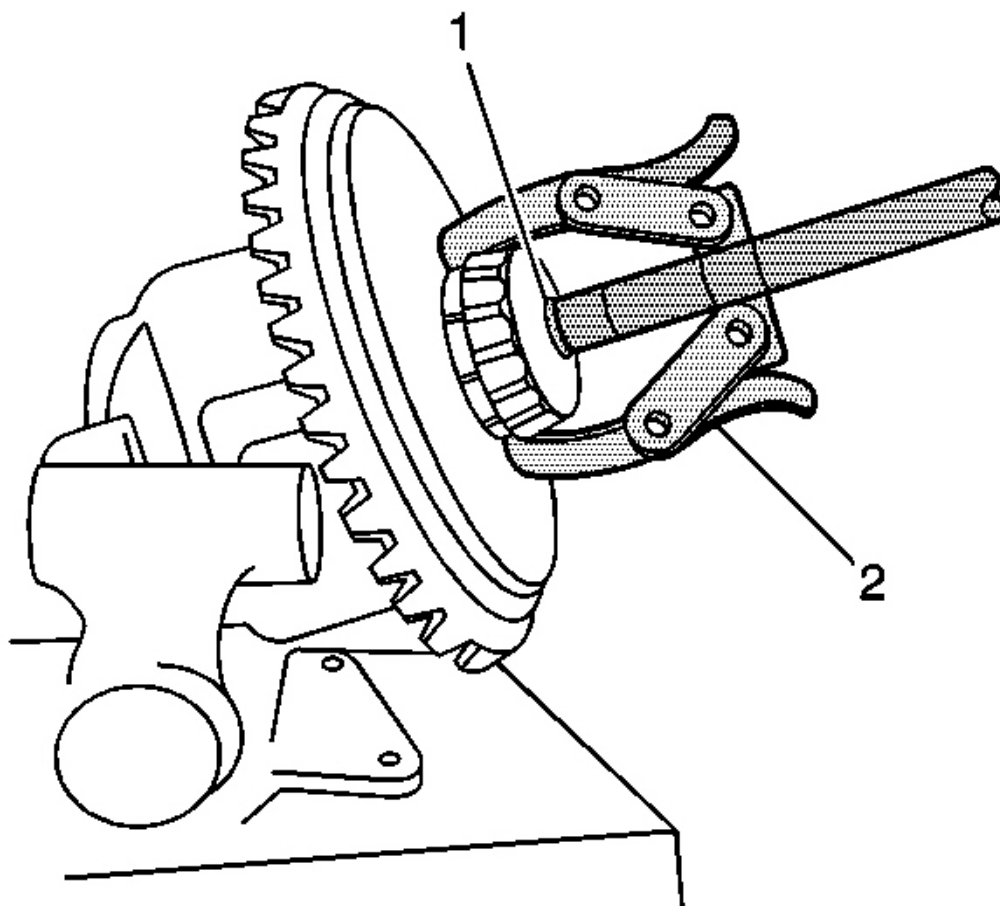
Identifying Special Tool J 22888-20A & Differential Side Bearing
